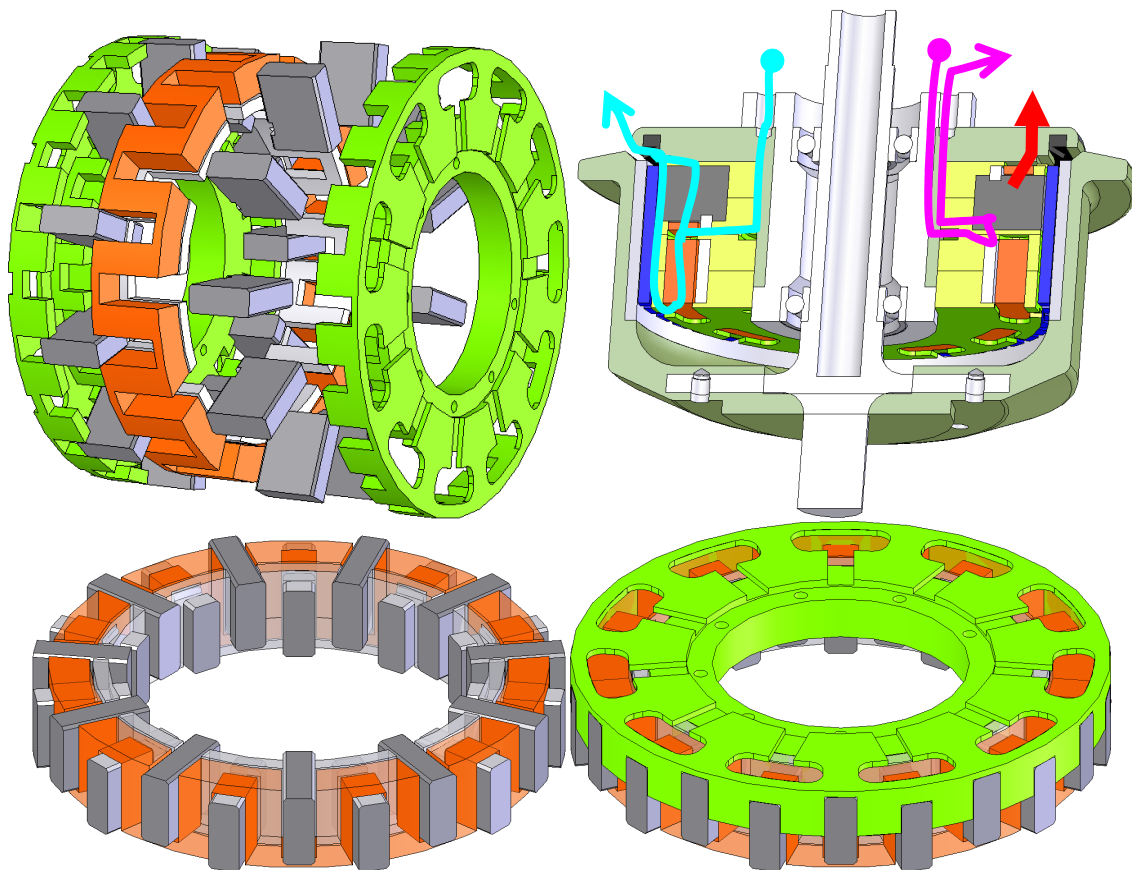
Explode view of a stator segment and cross-section view of the assembled machine including the electric and cooling paths (above) and stator segment mounting (below)
